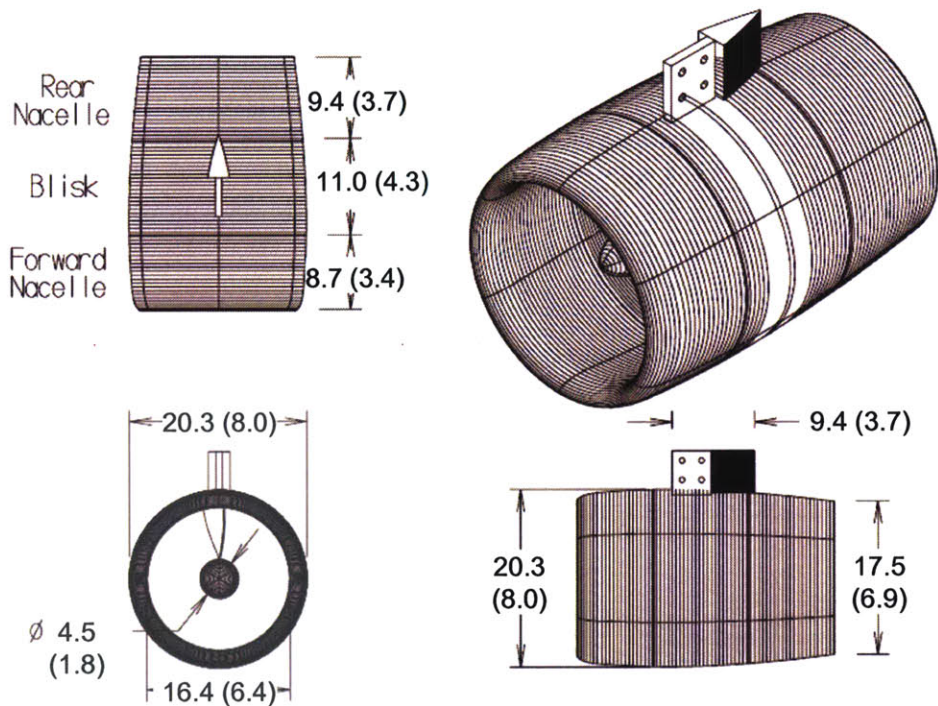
Dimensioned three-view layout of swirl tube test model. Primary dimensions are given in centimeters outside parenthesis with inch equivalents inside parenthesis.
